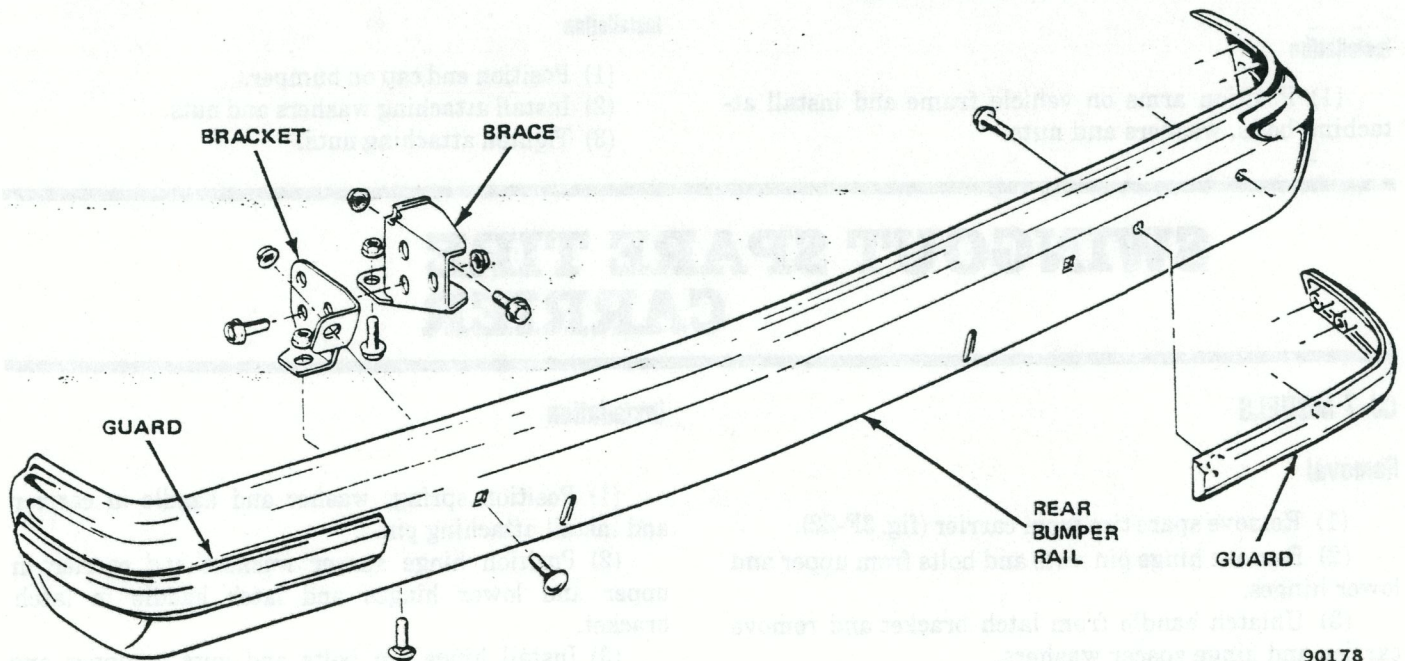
F-20 Rear Bumper—Cherokee-Wagoneer Models
